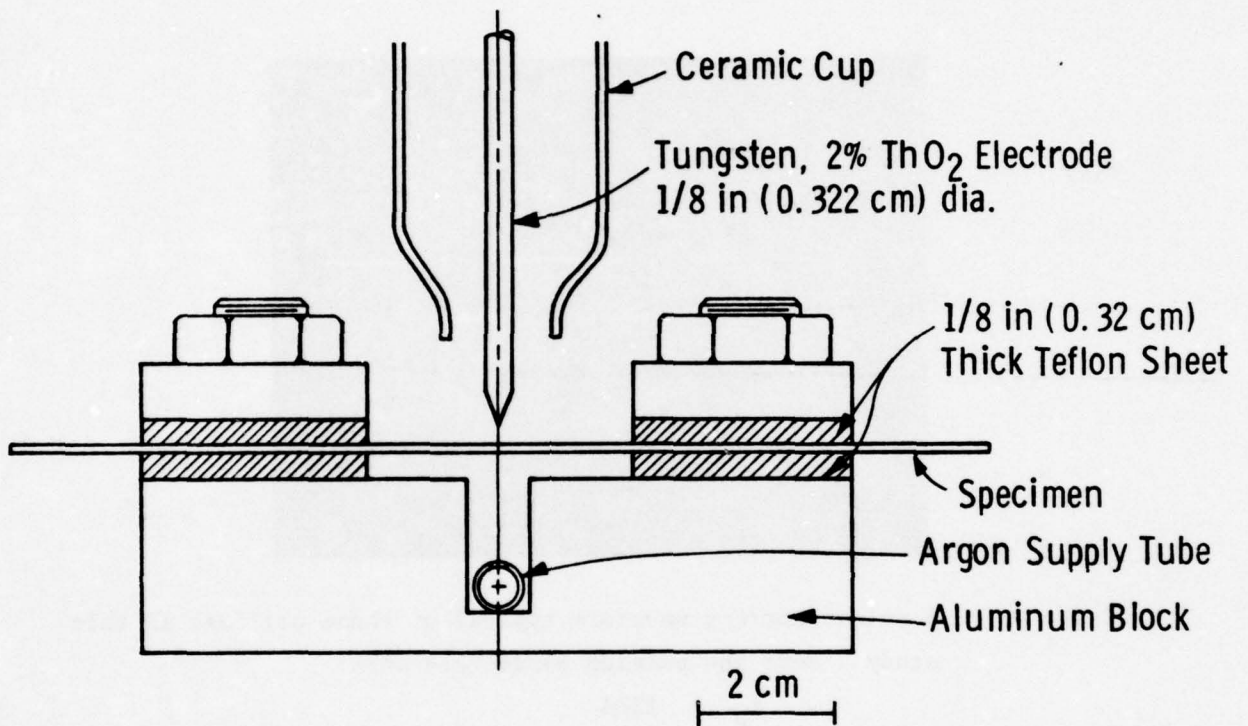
Cross-sectional view of the clamping fixture. Torch travel direction was normal to the paper
